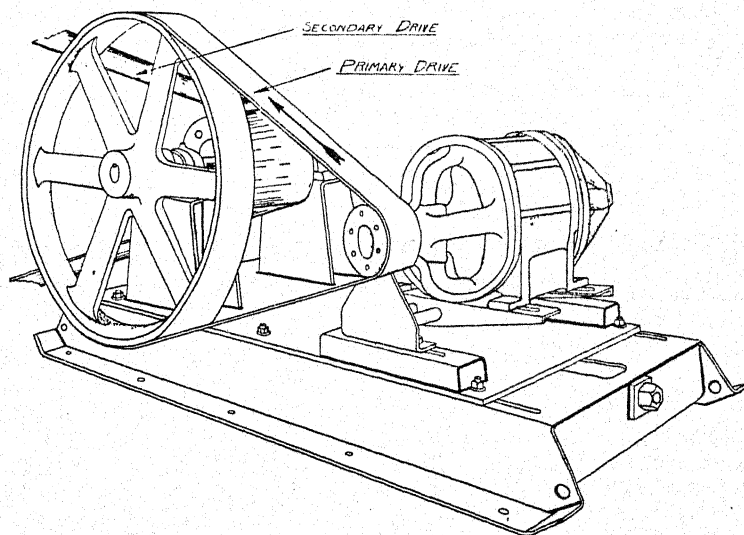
Tension control motor base, welded to sliding plate.
